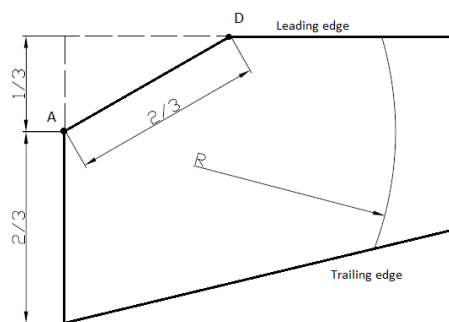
The center of the rotor of one blade. Adapted figure from [27].
